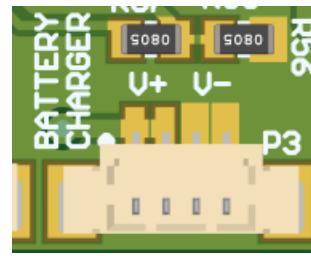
External batteries charger PicoBlade connector on the PCB.
